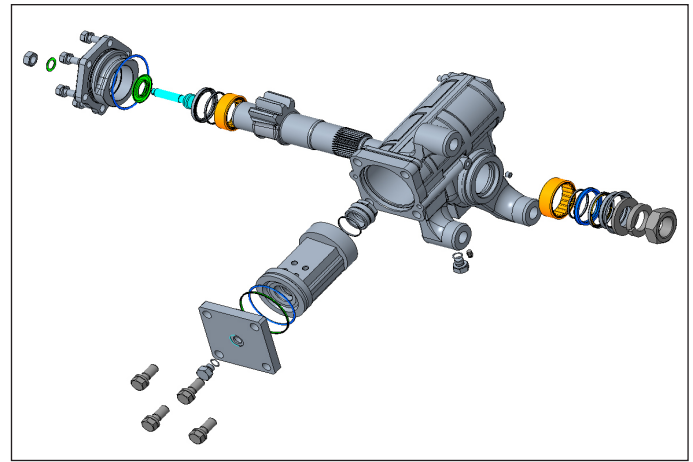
Hydraulic Power Steering Gear - Exploded View
